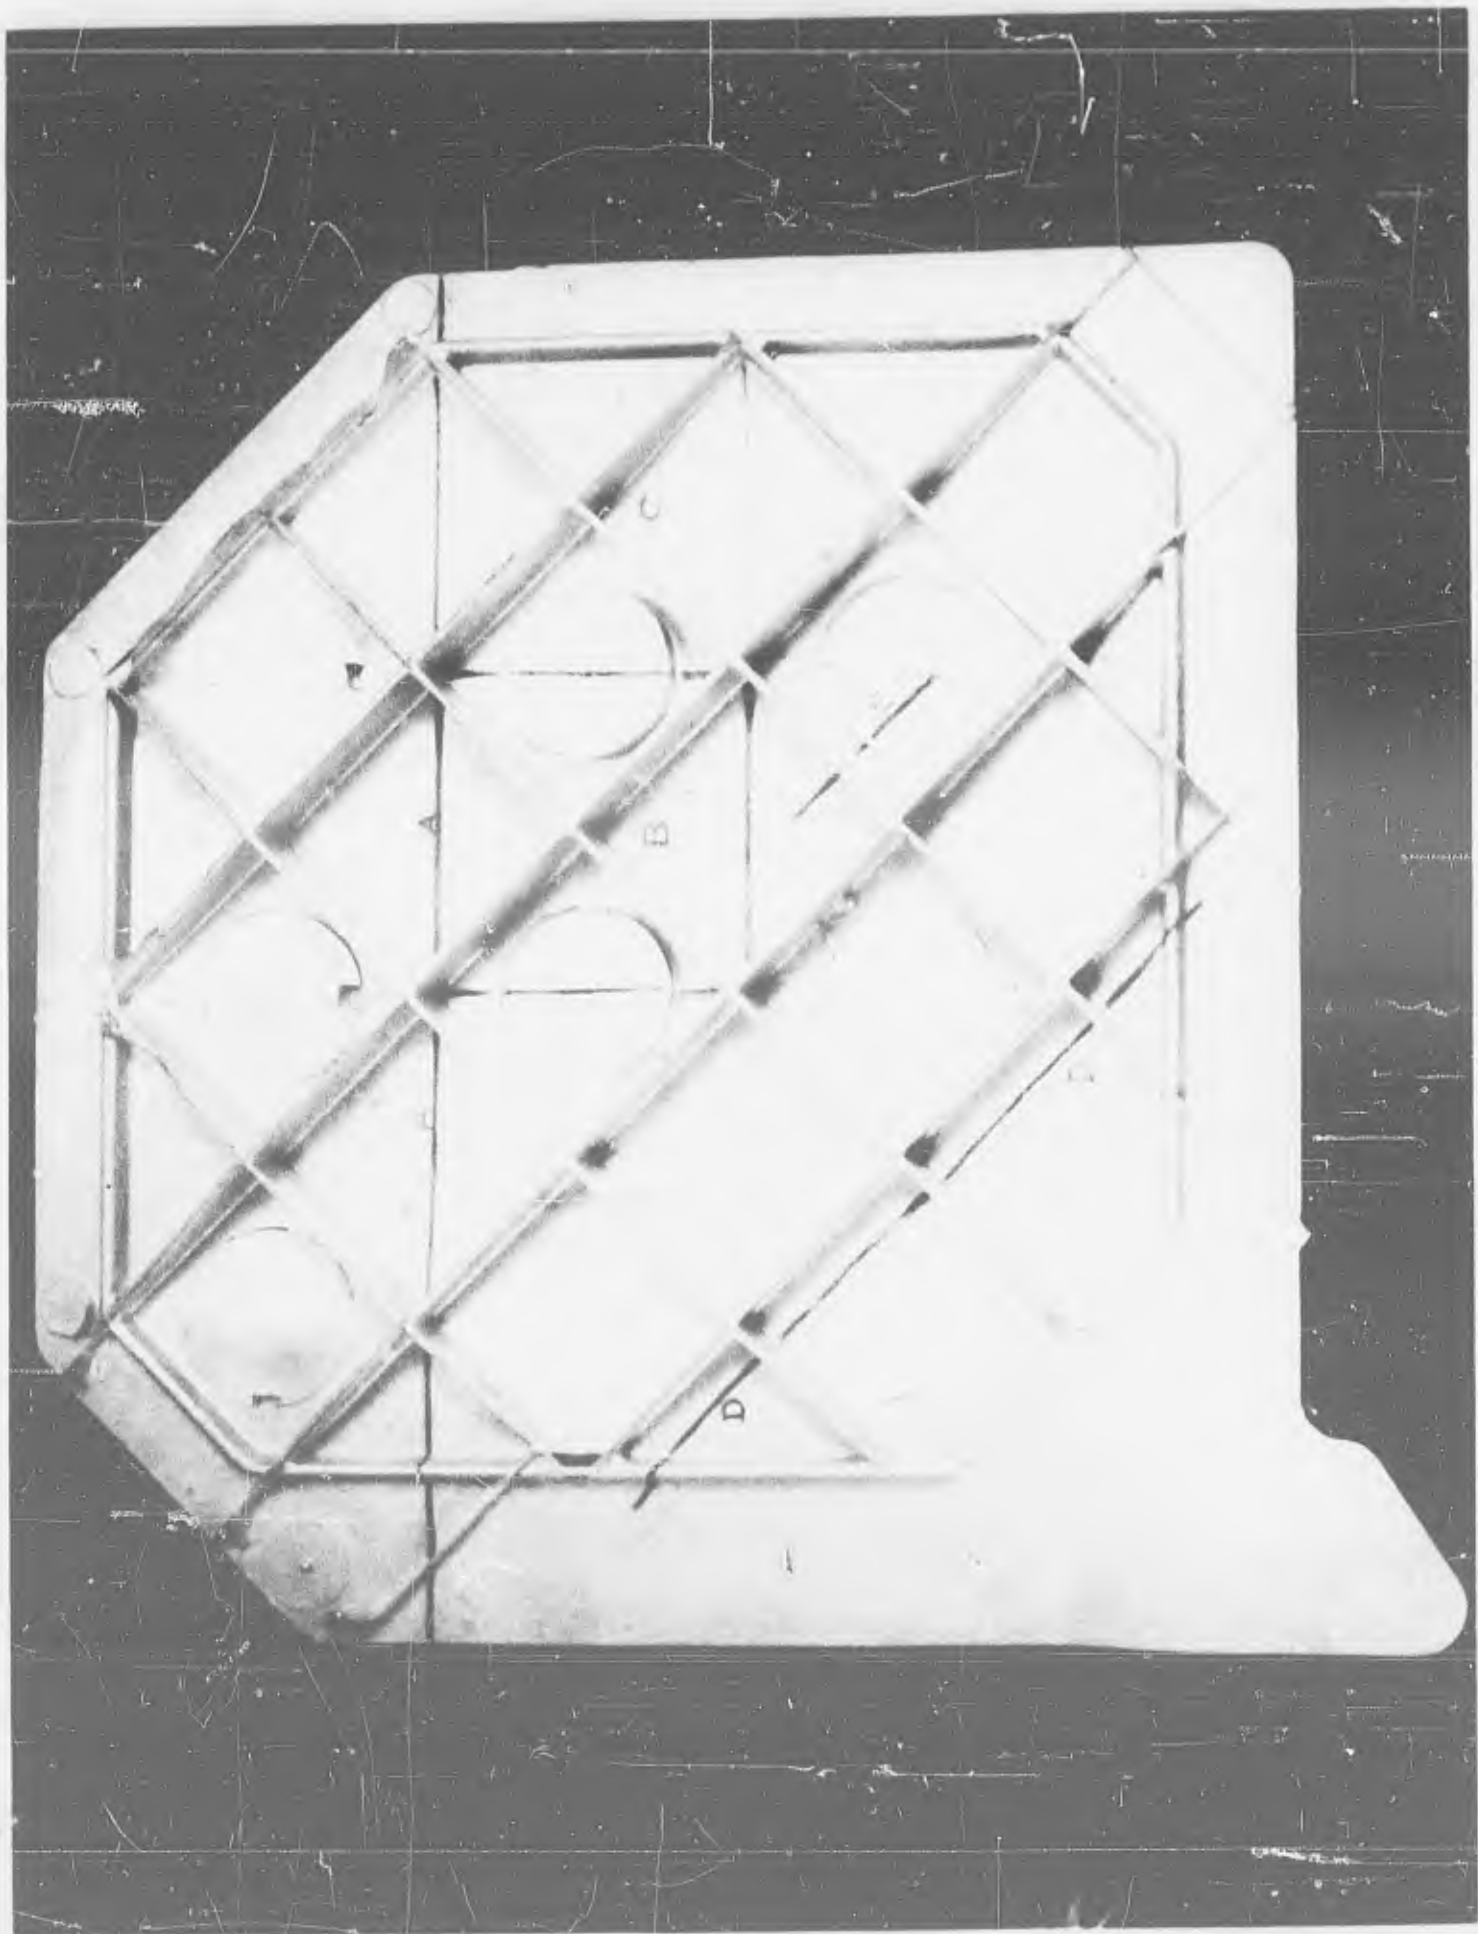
, X3/4 Micro Specimen Locations and Cutting Planes
